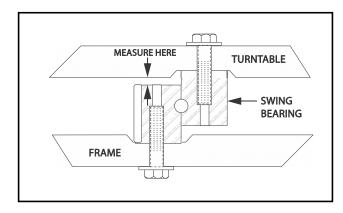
Swing Bearing Tolerance Measuring Point
